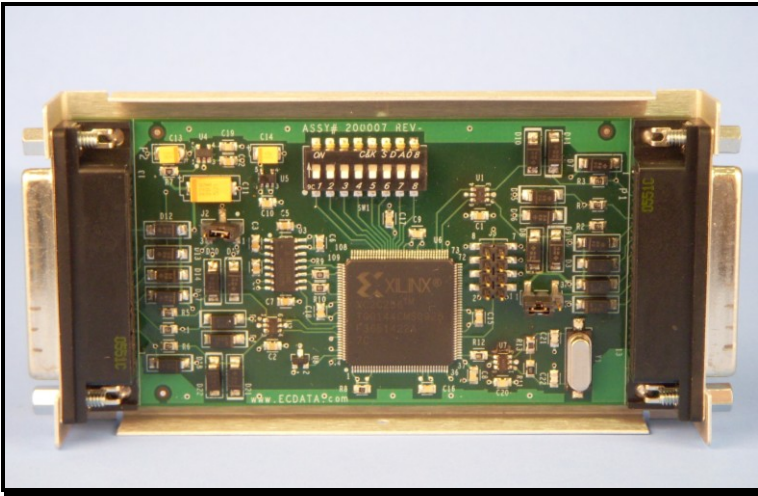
TCB-V.24 Printed Wiring Board (PCB)
